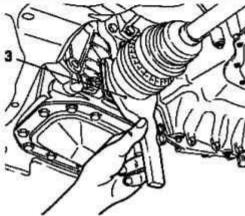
Removing the shaft wheel: 1, 2, 3 - special tool
